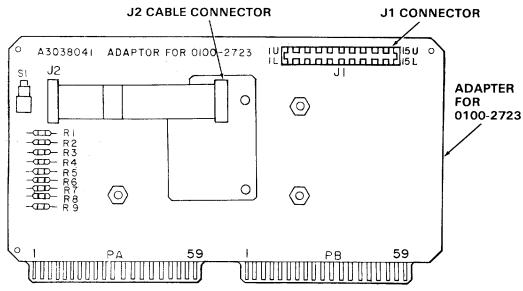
Cable Connection Points and Components Used During Printer Drive Board Test (Sheet 1 of 2)
